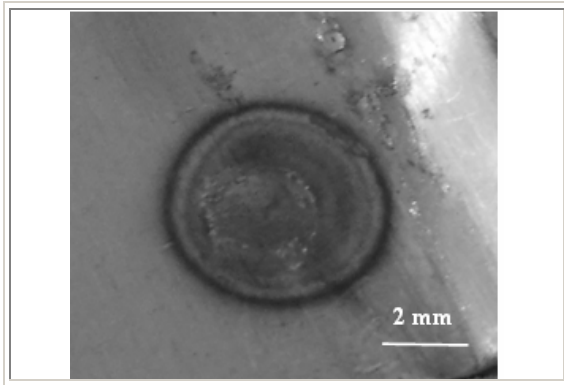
View of steel S235JRG2 welding nugget
